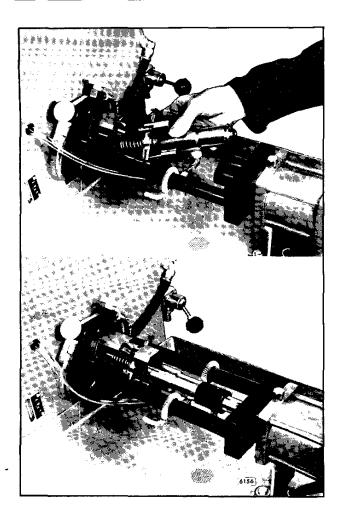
Placing Injector and Adaptor in Calibrator.
